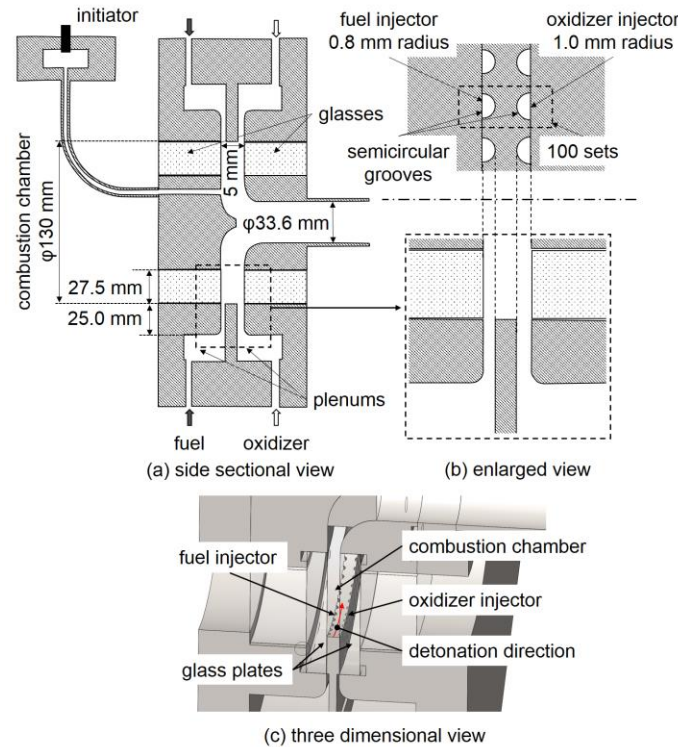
(a) Schematic of side-sectional view of the disk-shaped RDC; (b) an enlarged view around the injectors; and (c) a 3-D view of the injectors
